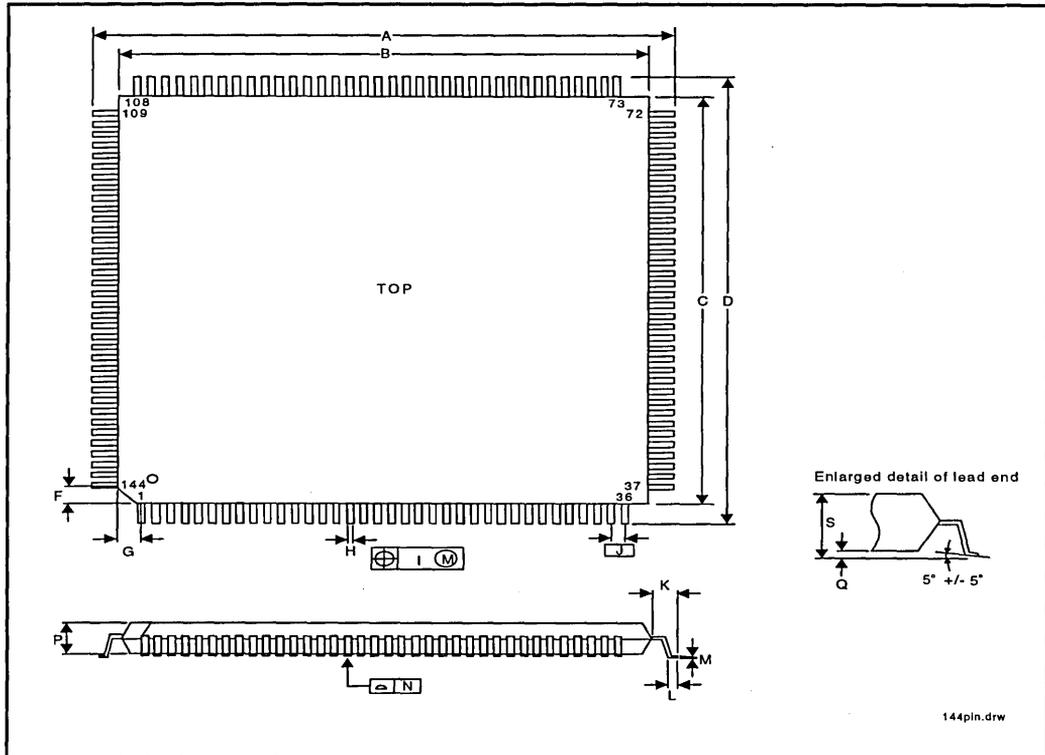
MIC Package Physical Dimensions (144-Pin QFP)
